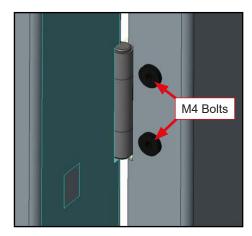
Outside Cabinet View Replacement Door Bolts Door-Side Only
